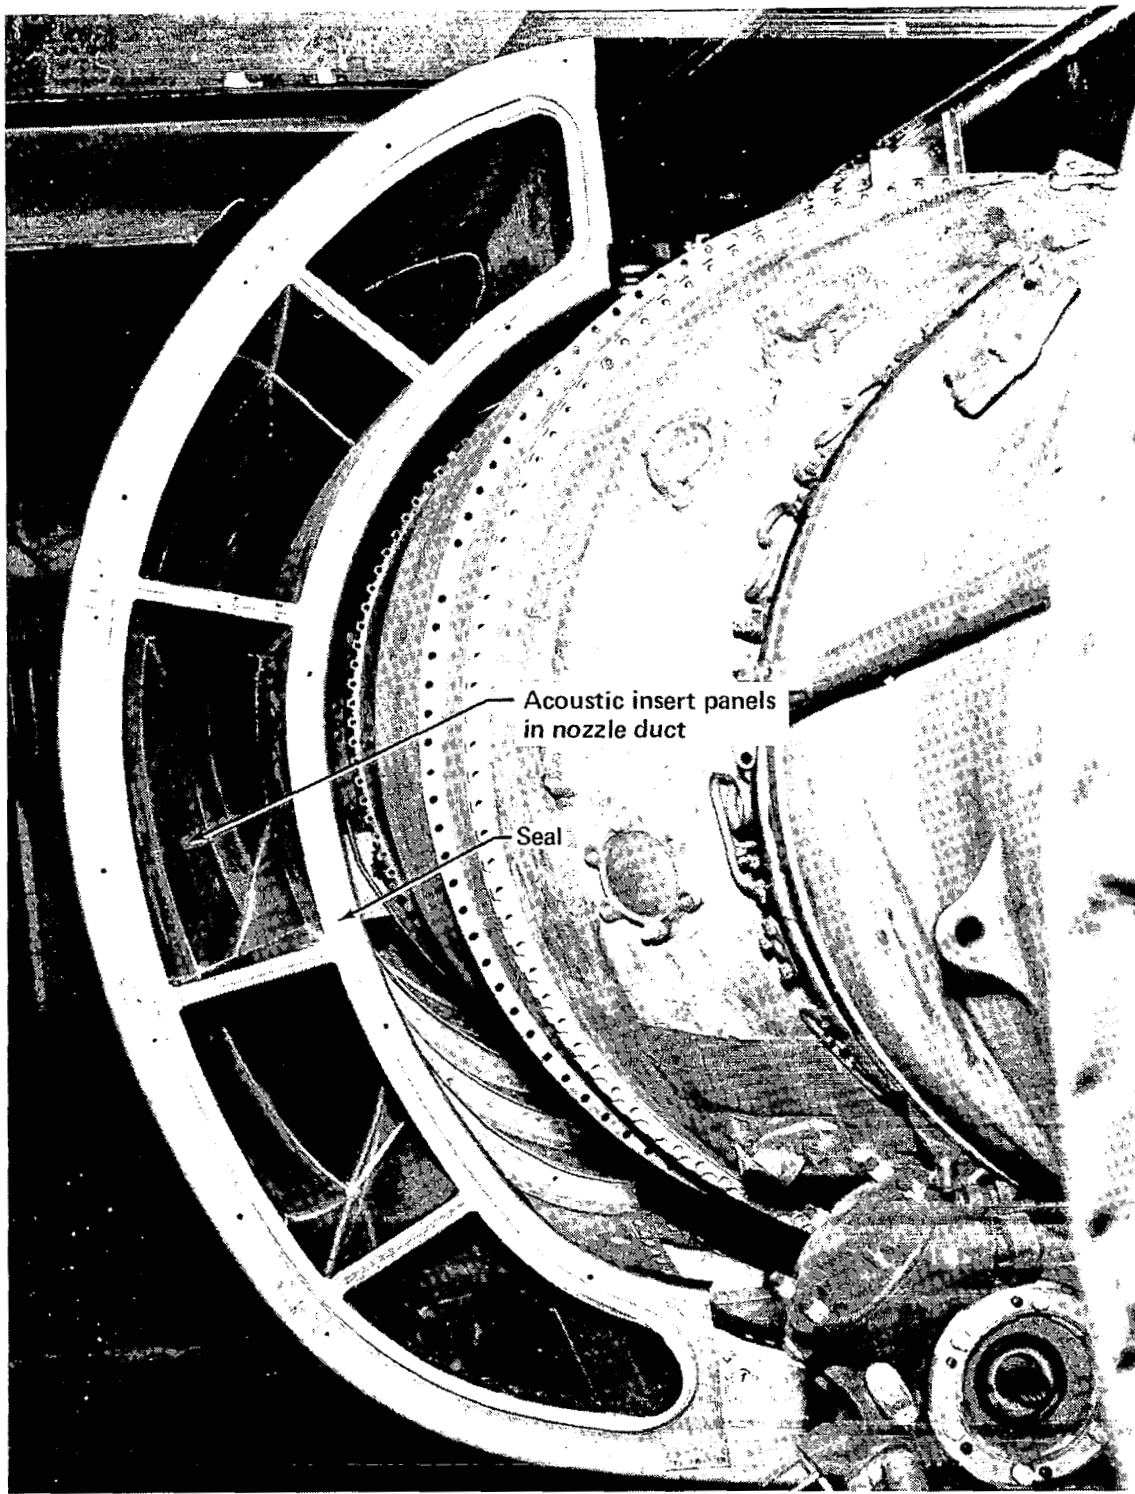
BOILERPLATE NOZZLE DUCT INSTALLATION
